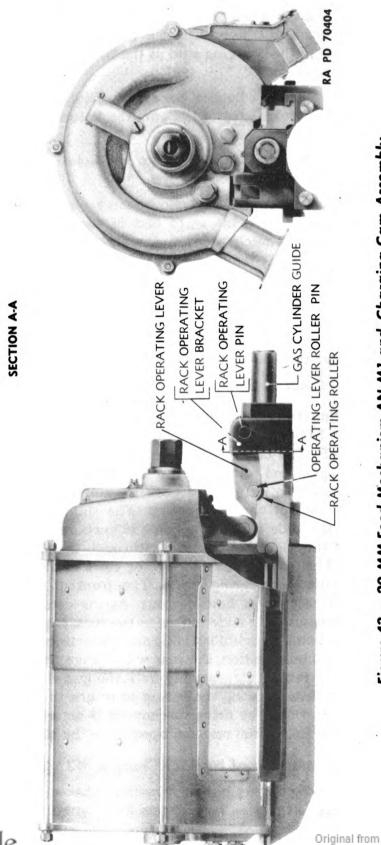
20-MM Feed Mechanism AN-M1 and Charging Cam Assembly
